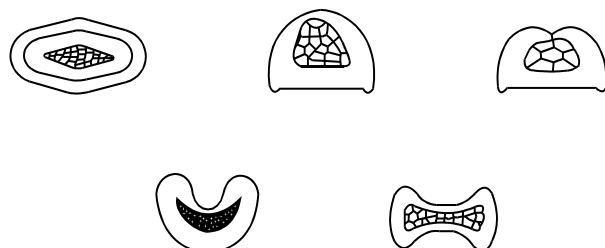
Cross Sectional Views Of Type 2 Crimps
